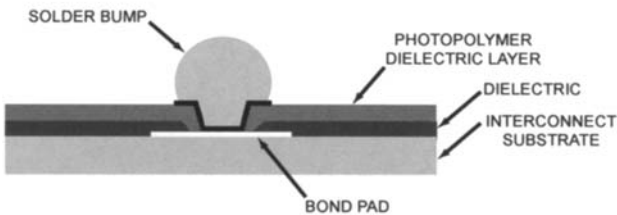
Reconfiguring of bonding pad for solder bumping.
